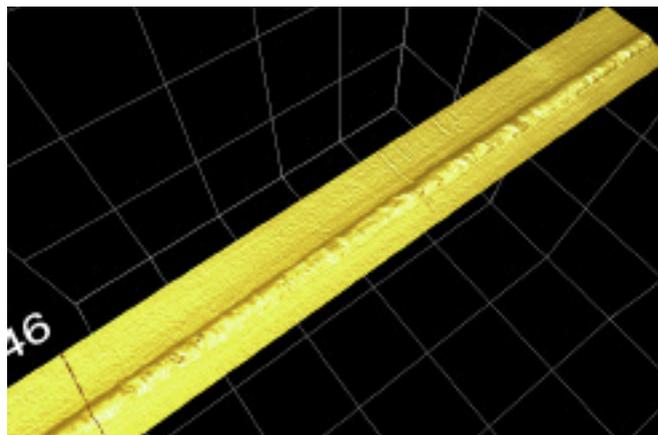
Three-dimensional image of the inside of a tube weld.
